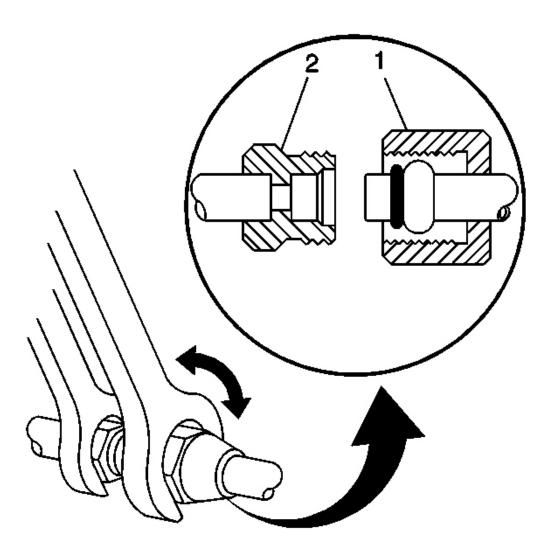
Disassembling/Reassembling A/C Line Fittings Courtesy of GENERAL MOTORS CORP.
